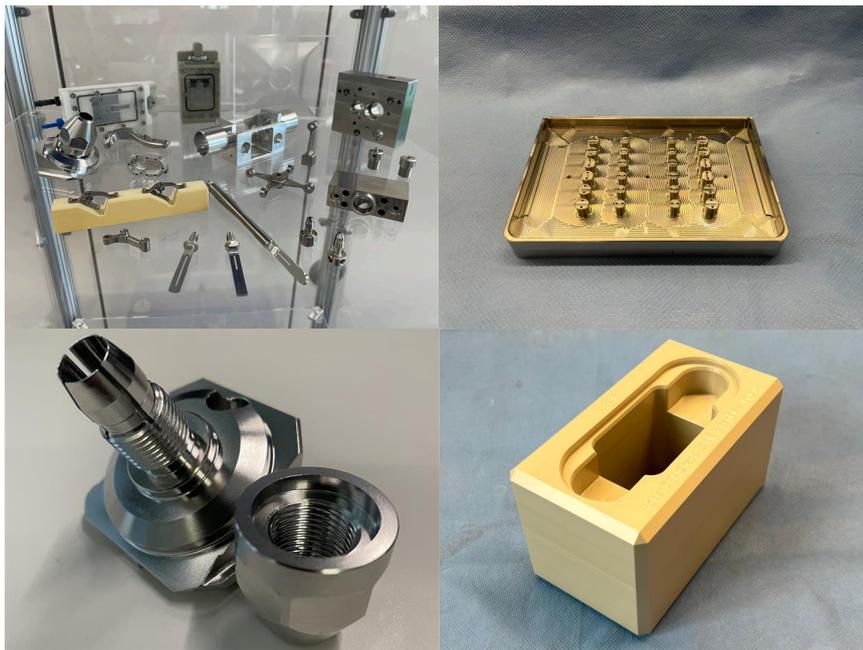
Examples of parts we manufacture at the MDP Workshop such as a milled part made of stainless steel (top right) or a dental implant holder for load testing in dentistry (bottom left).
